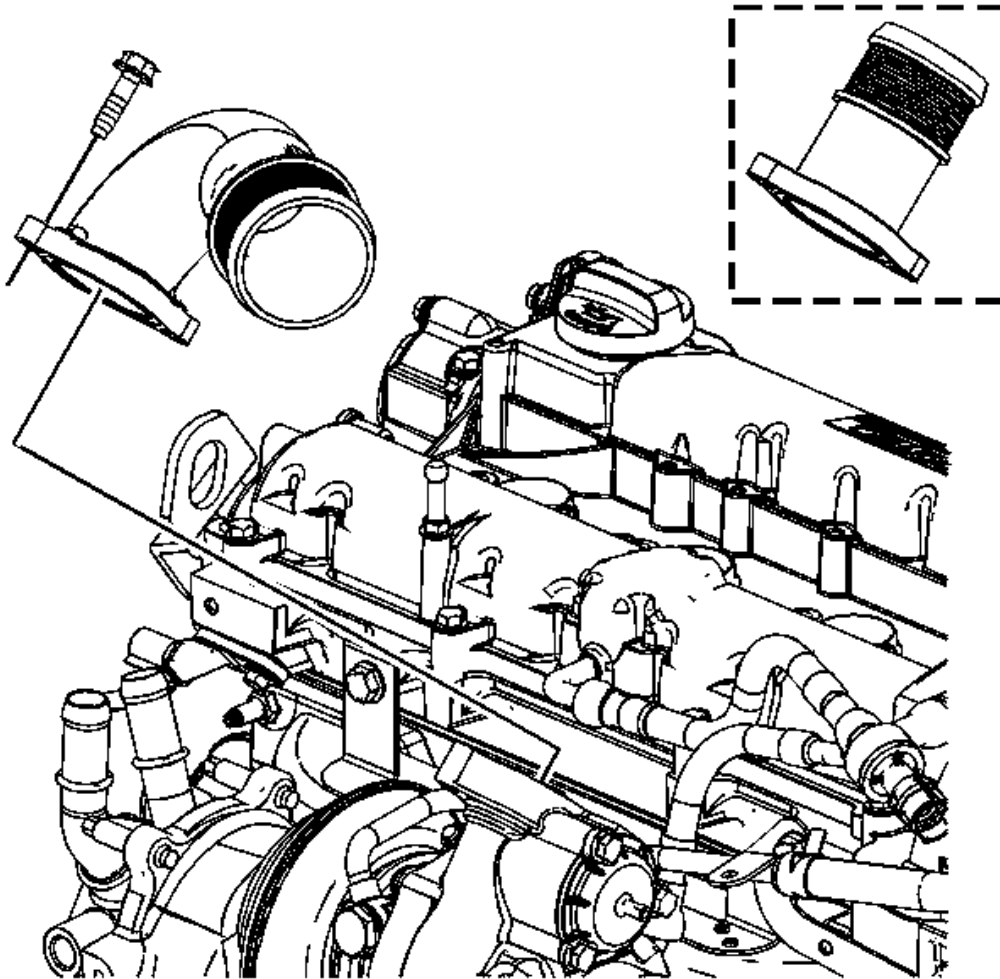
Identifying Charge Air Cooler Inlet Pipe
